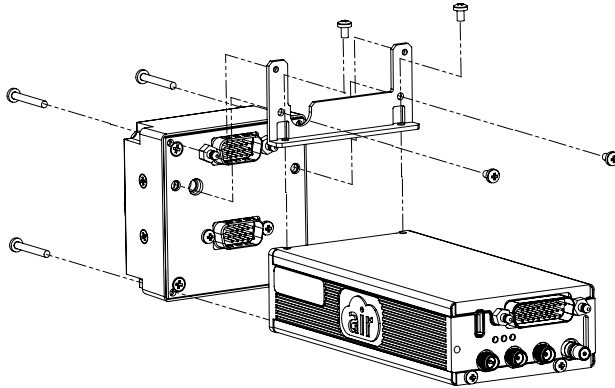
Exploded drawing of ATD-57, AT-1, and all small parts of the optional mounting kit.
